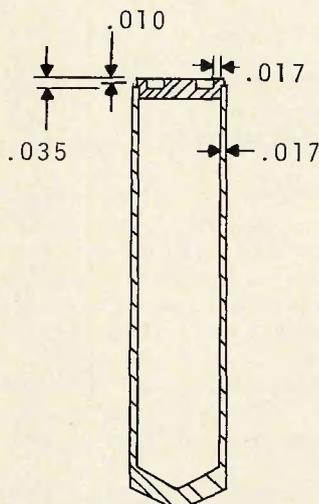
Middle capsule weld joint details. Scale: 4X
